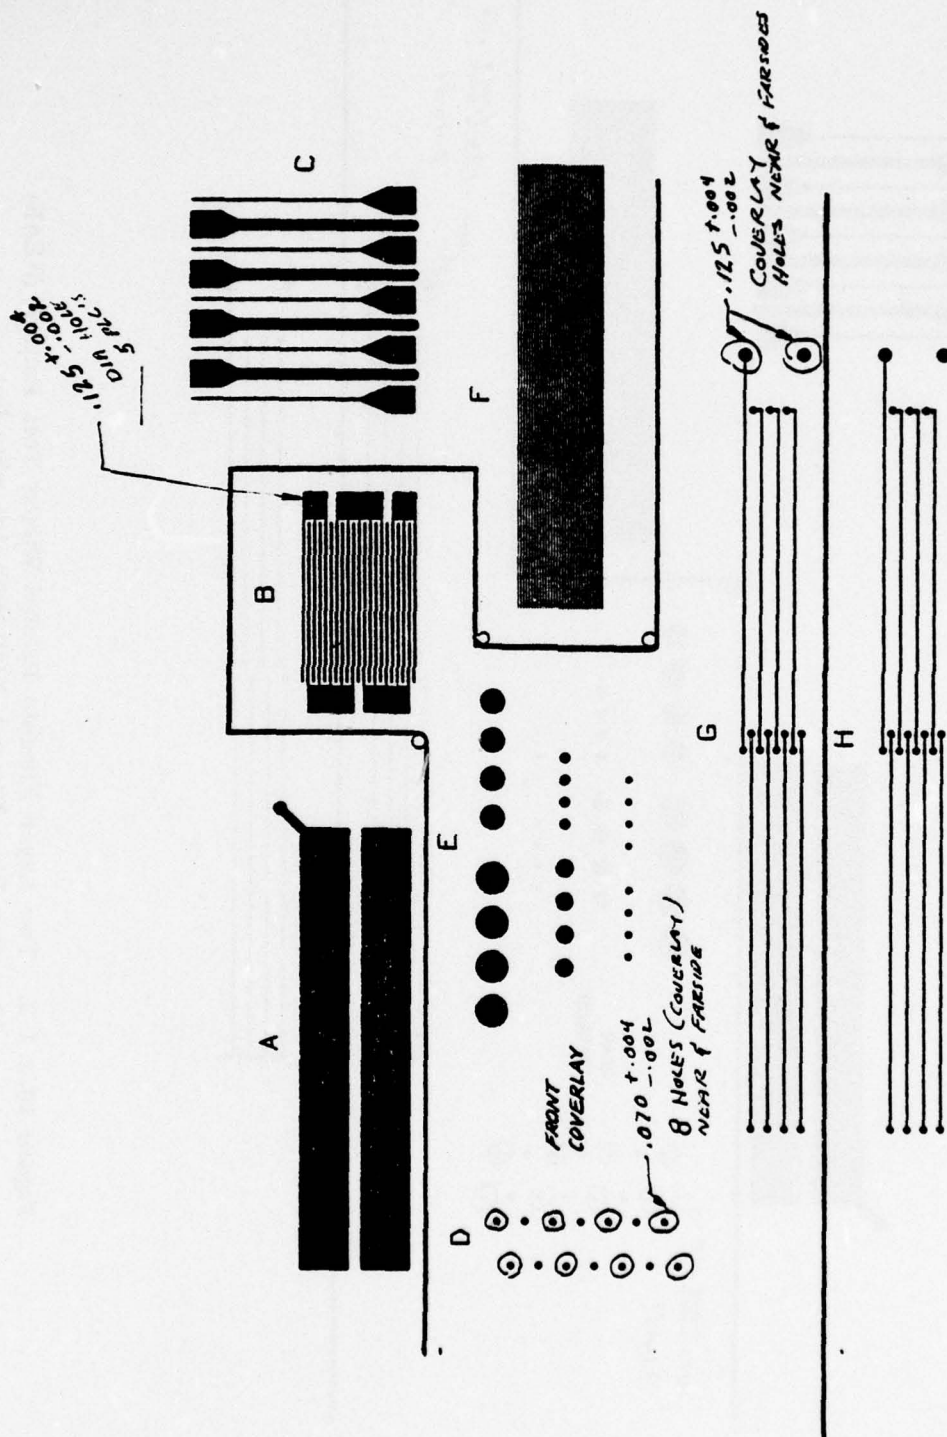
Two Layer Flexible Printed Wiring Test Pattern (FRONT)
